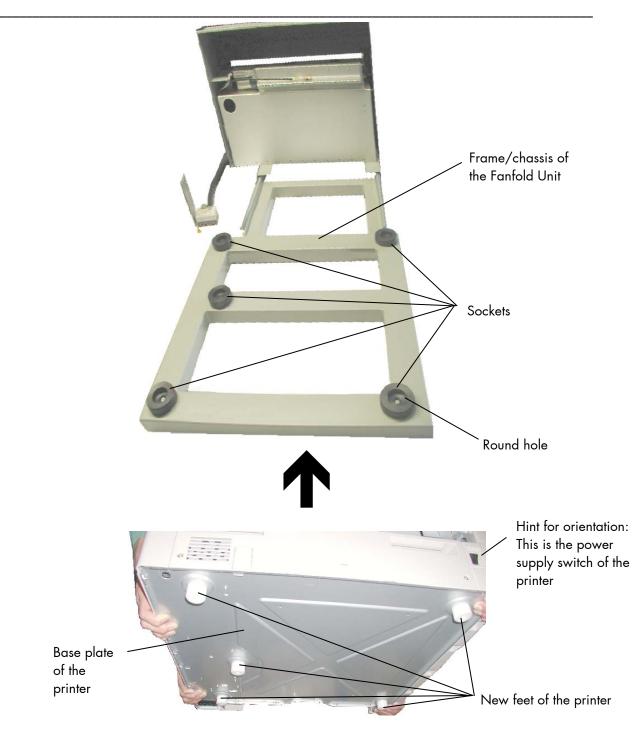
a Lift the printer and align it to the frame/chassis of the Fanfold Unit
